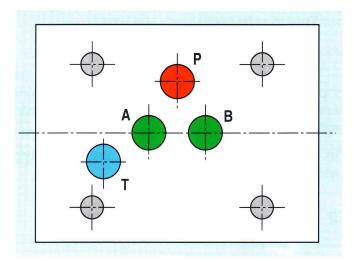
Mounting pattern, form A10 DIN 24 340 Mounting pattern size 6 preferrably used for directional valves
